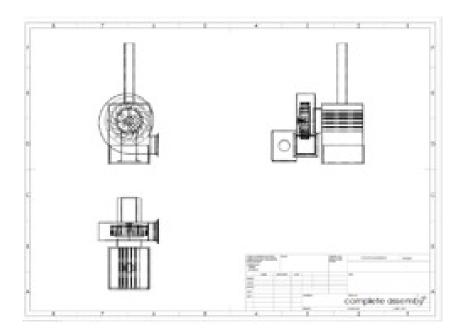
3D CAD rendering of the complete heat exchanger assembly
